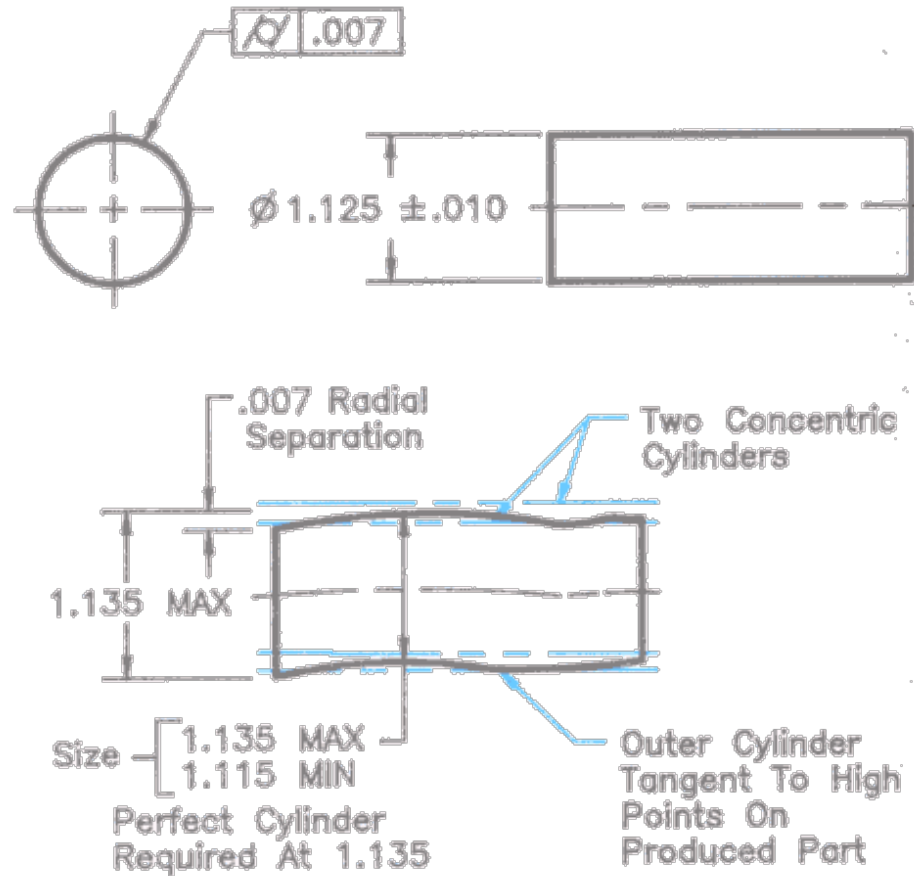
Cylindricity tolerances result in a tolerance zone bounded by two concentric cylinders.
